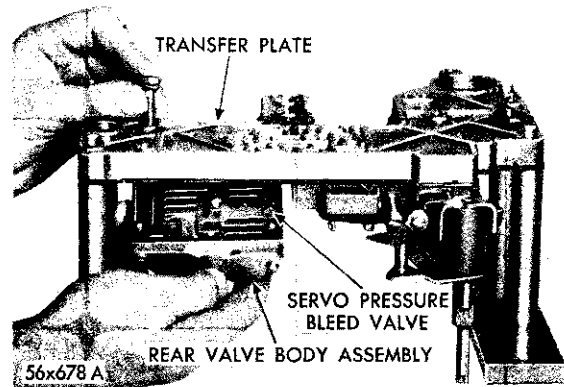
Removal and Installation of Rear Valve Body Assembly
